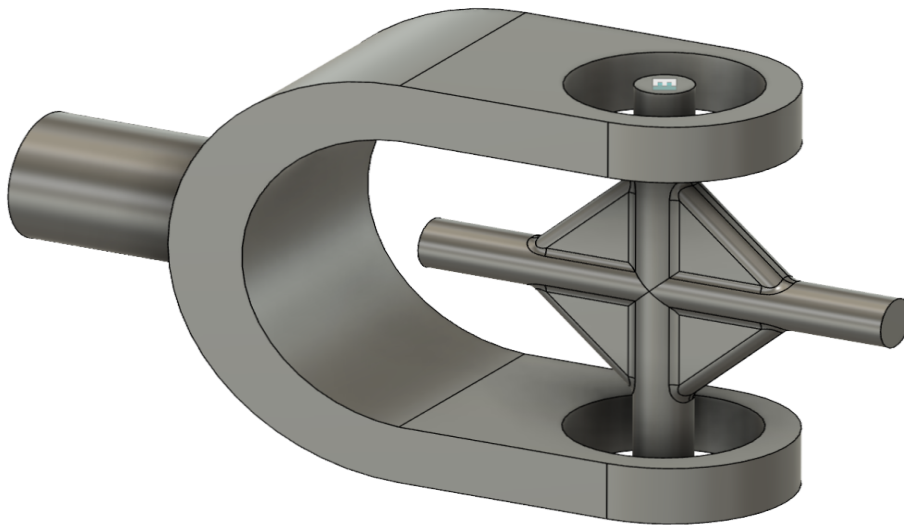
CAD model of the yoke and cross attached with each other using ball bearings
